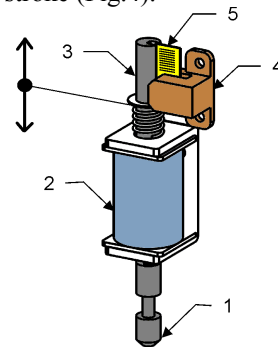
Engraving tool: 1-diamond tip, 2-solenoid, 3-plunger, 4-quadrature encoder, 5-interrupter strip
